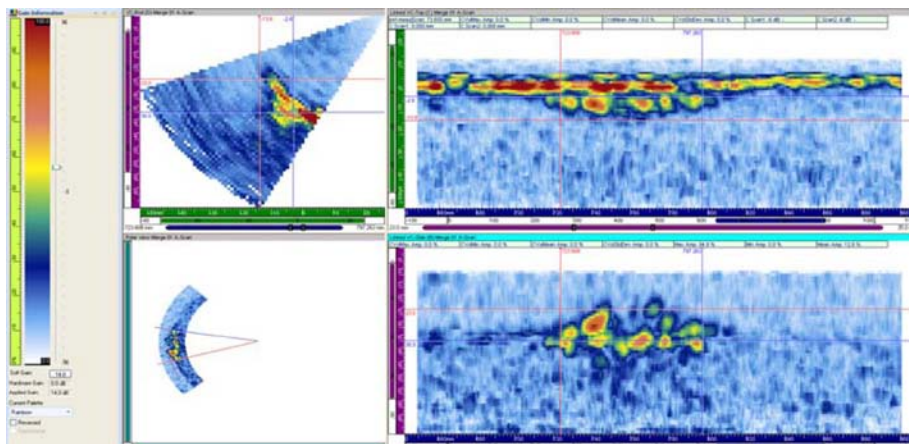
Specimen 9C-034 Flaw 1 After Weld Crown Removal at 2 MHz, Line Scan Data
